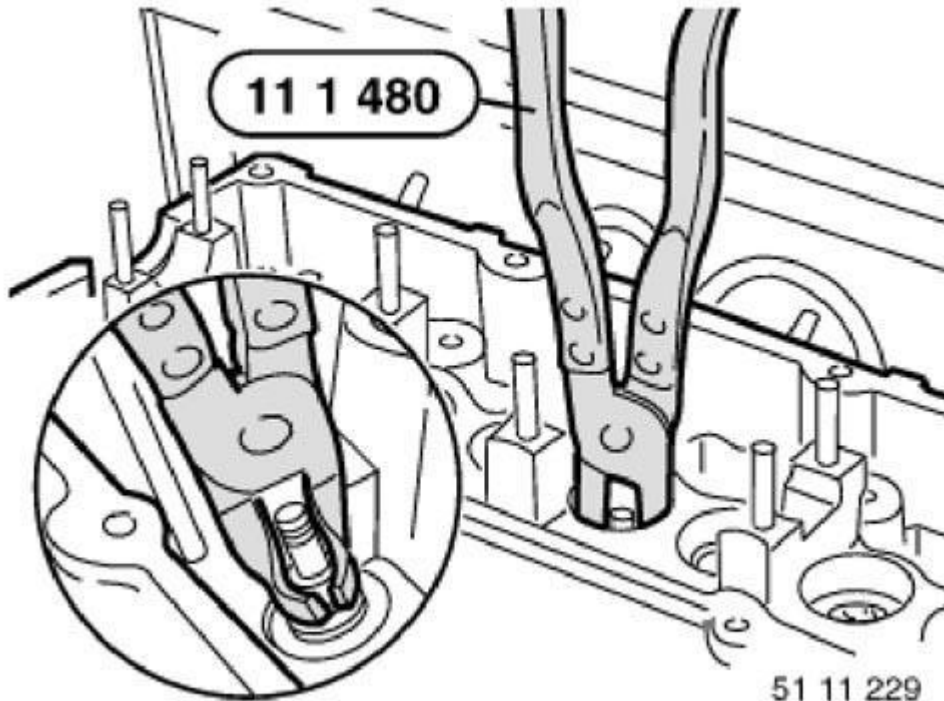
Identifying Special Tool 11 1 480 Onto Old Valve Stem Seals
